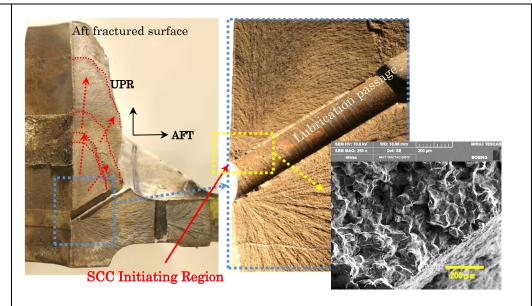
Aft Fractured Surface of the Right Half of the Fractured Axle (after Cleaning)
